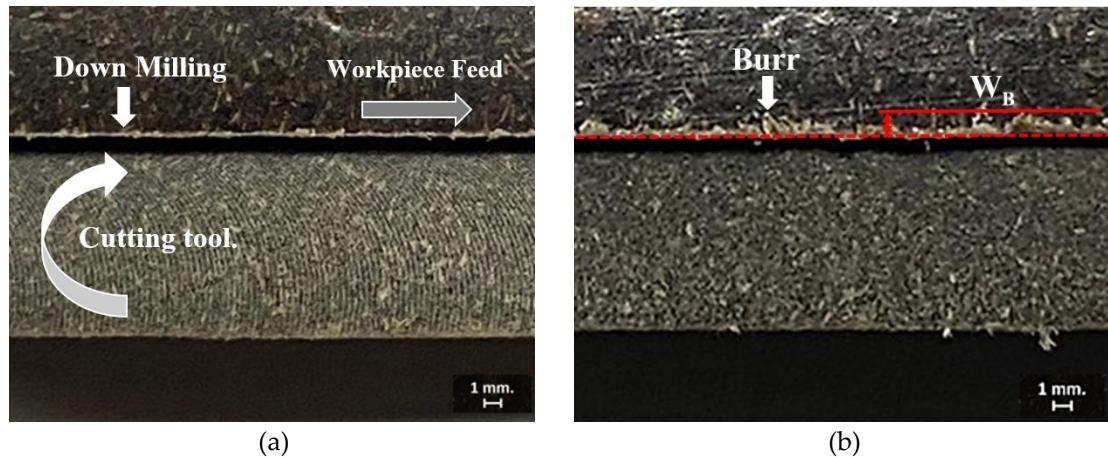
Characteristics of side milled workpiece: (a) Negligible burr formation and (b) burr formation.
